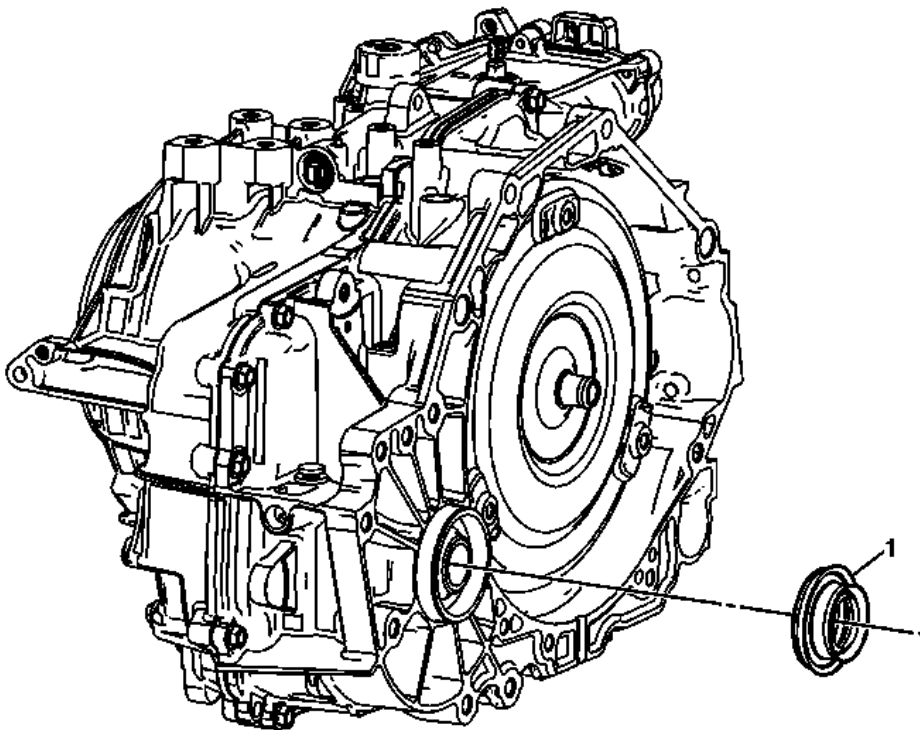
Identifying Right Front Wheel Drive Shaft Seal
